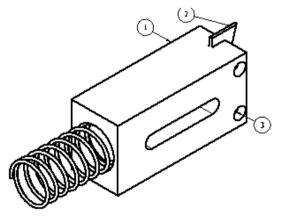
The peeling knife assembly (1-knife holder; 2-peeling knife; 3-Fastener)
